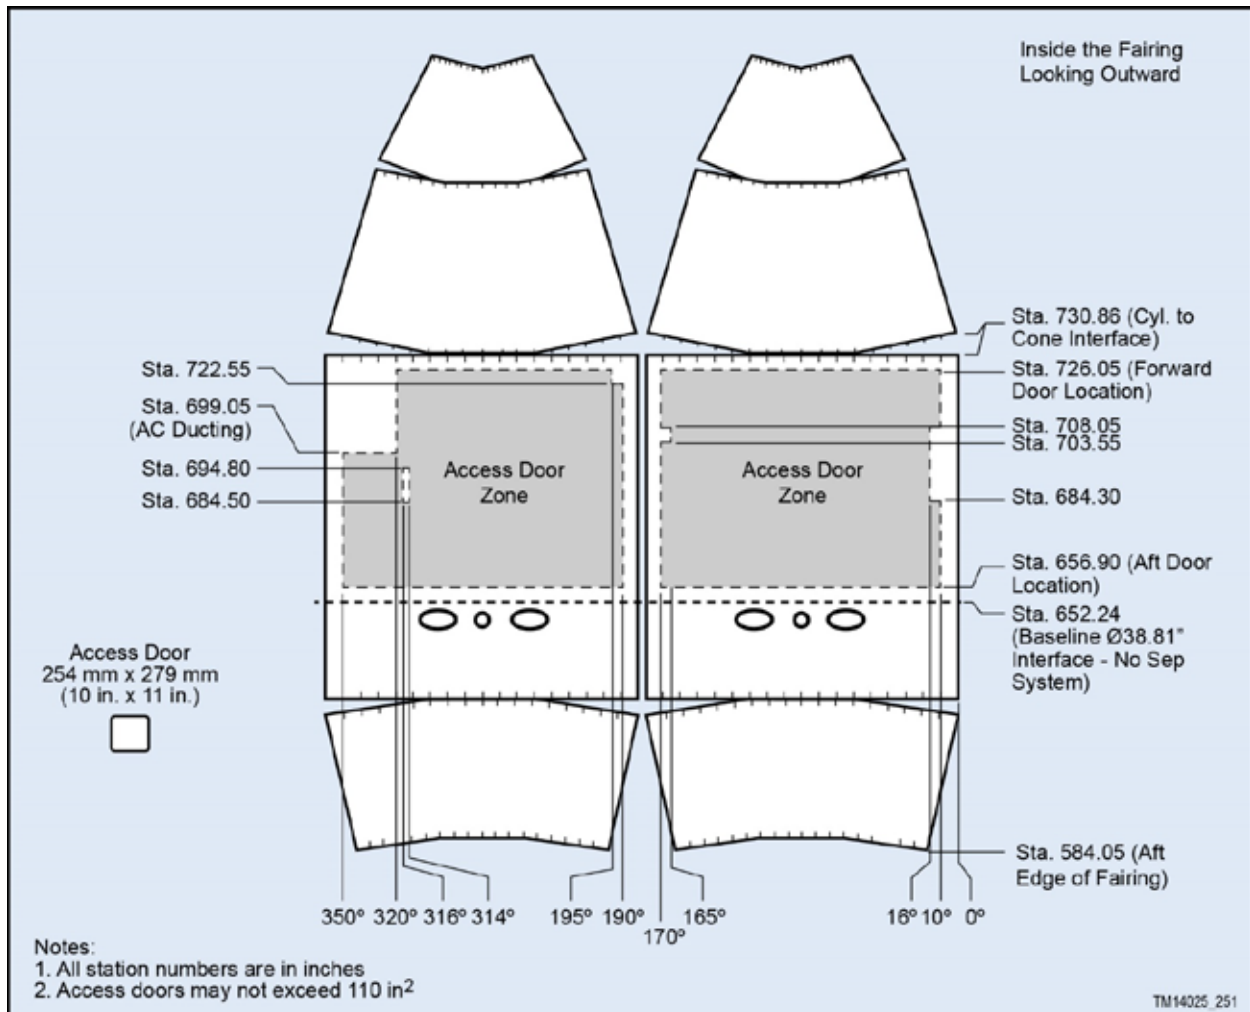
61” Payload Fairing Access Door Placement Zone
